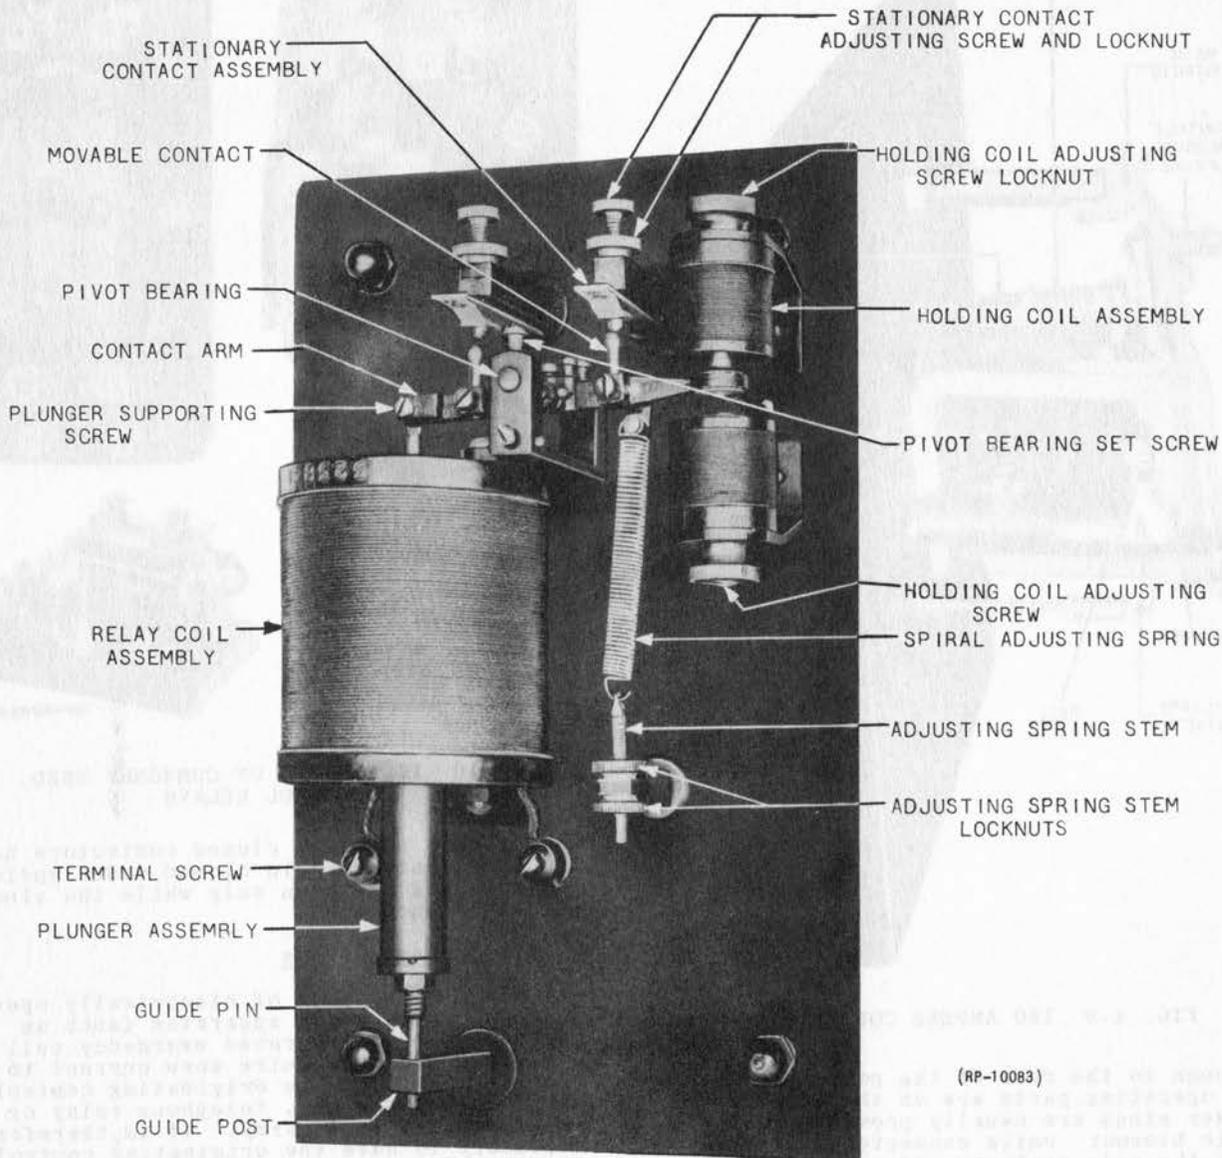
VOLTAGE RELAY ASSEMBLY
